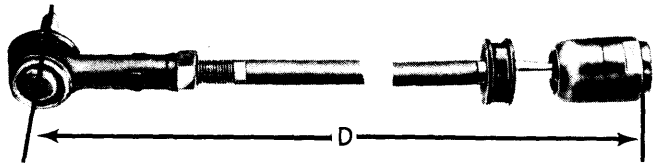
Adjustment of Replacement Tie Rod (Part No. 171 419 804)
